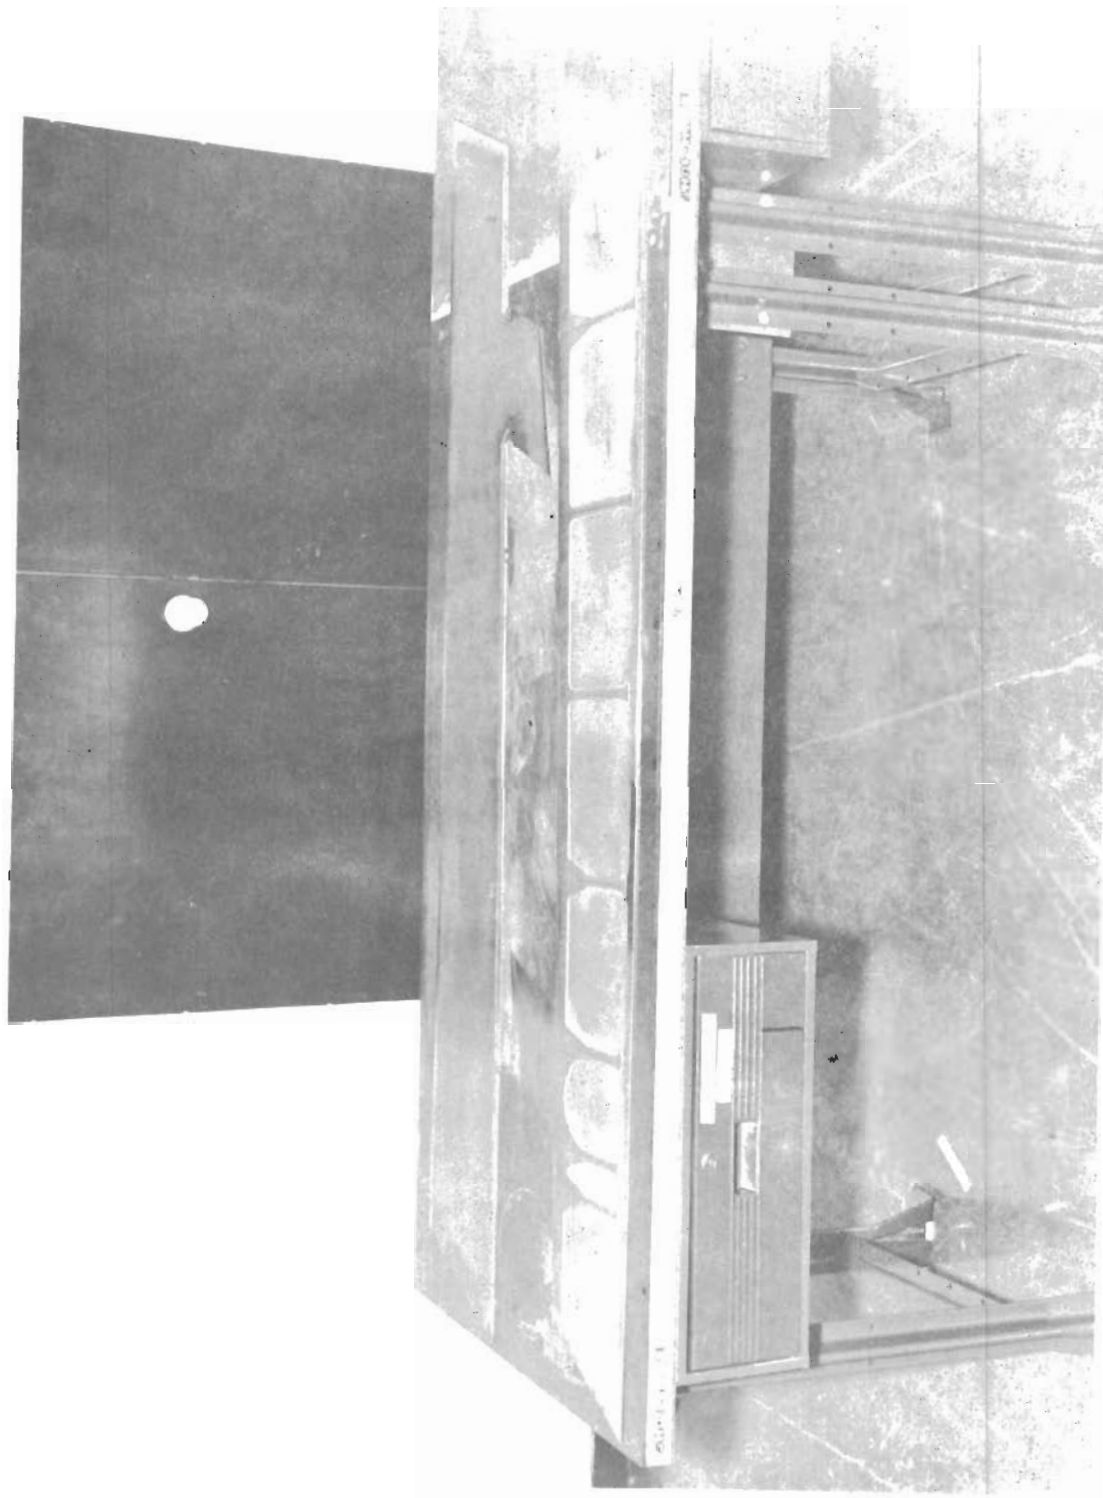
Beryllium Rudder Front Torque Box Cover Skins
